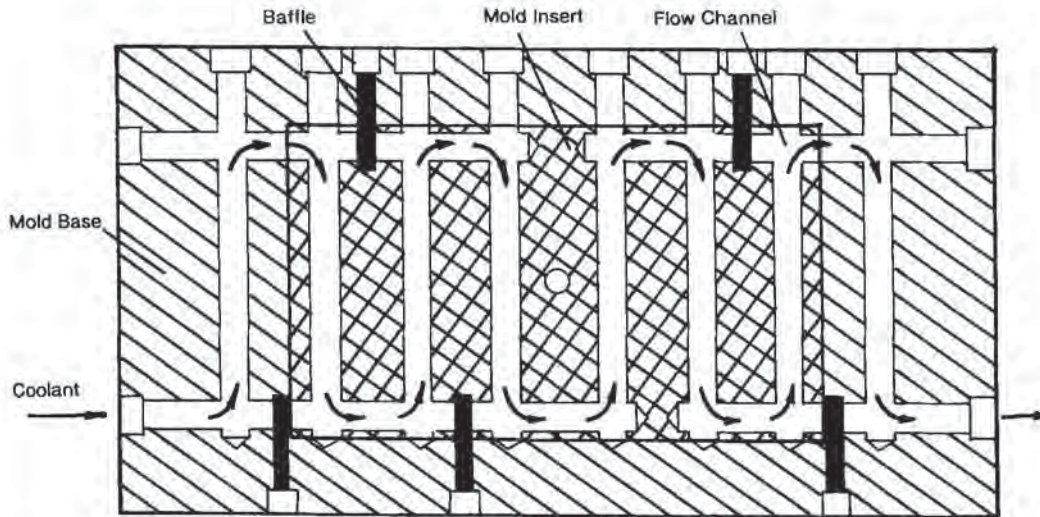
Typical serpentine coolant flow channel through thermoforming mold
